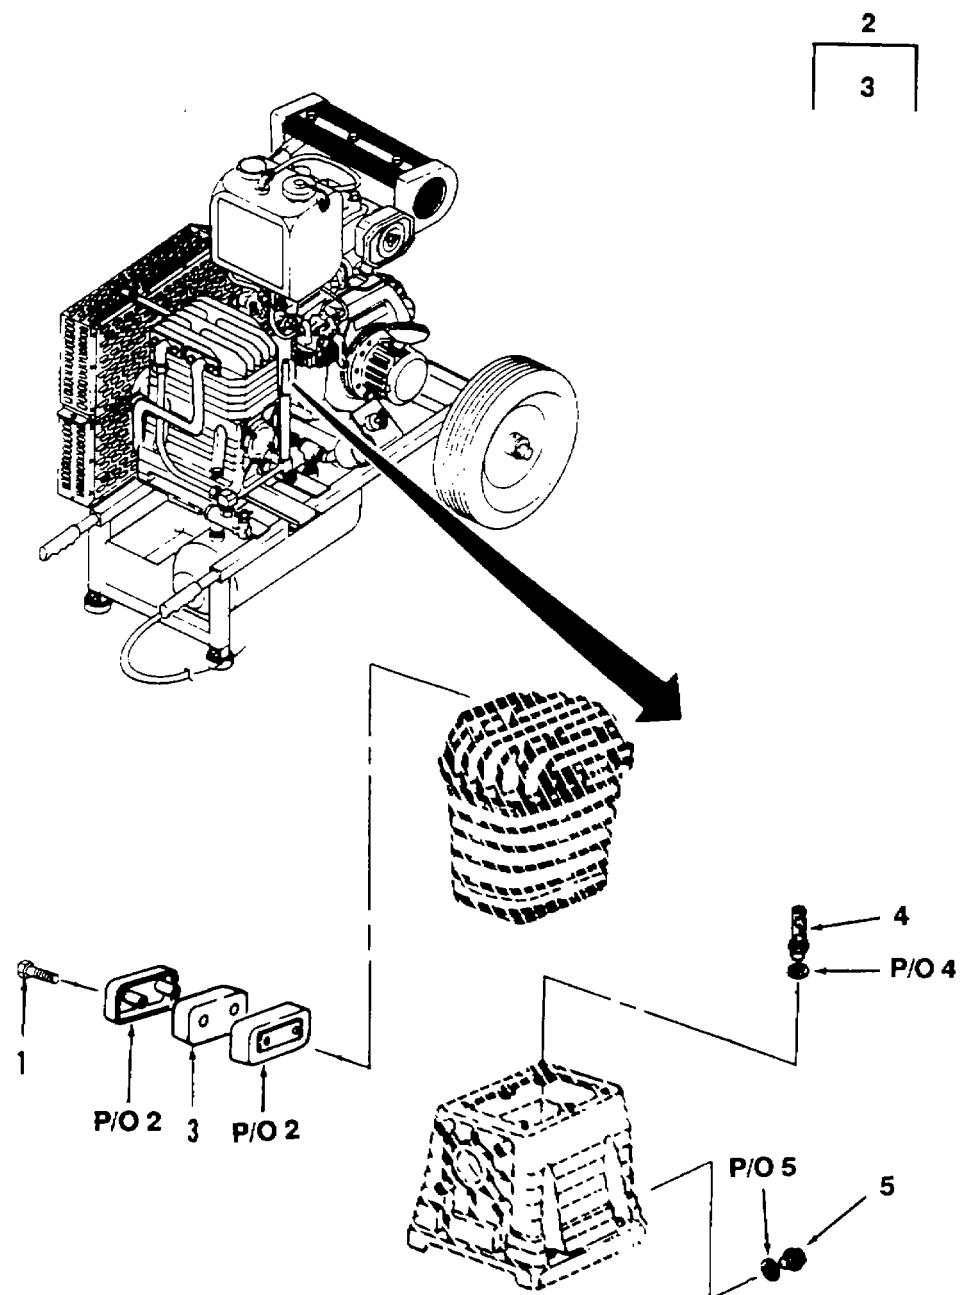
Filter Assembly, Oil Filler, and Sight Glass
